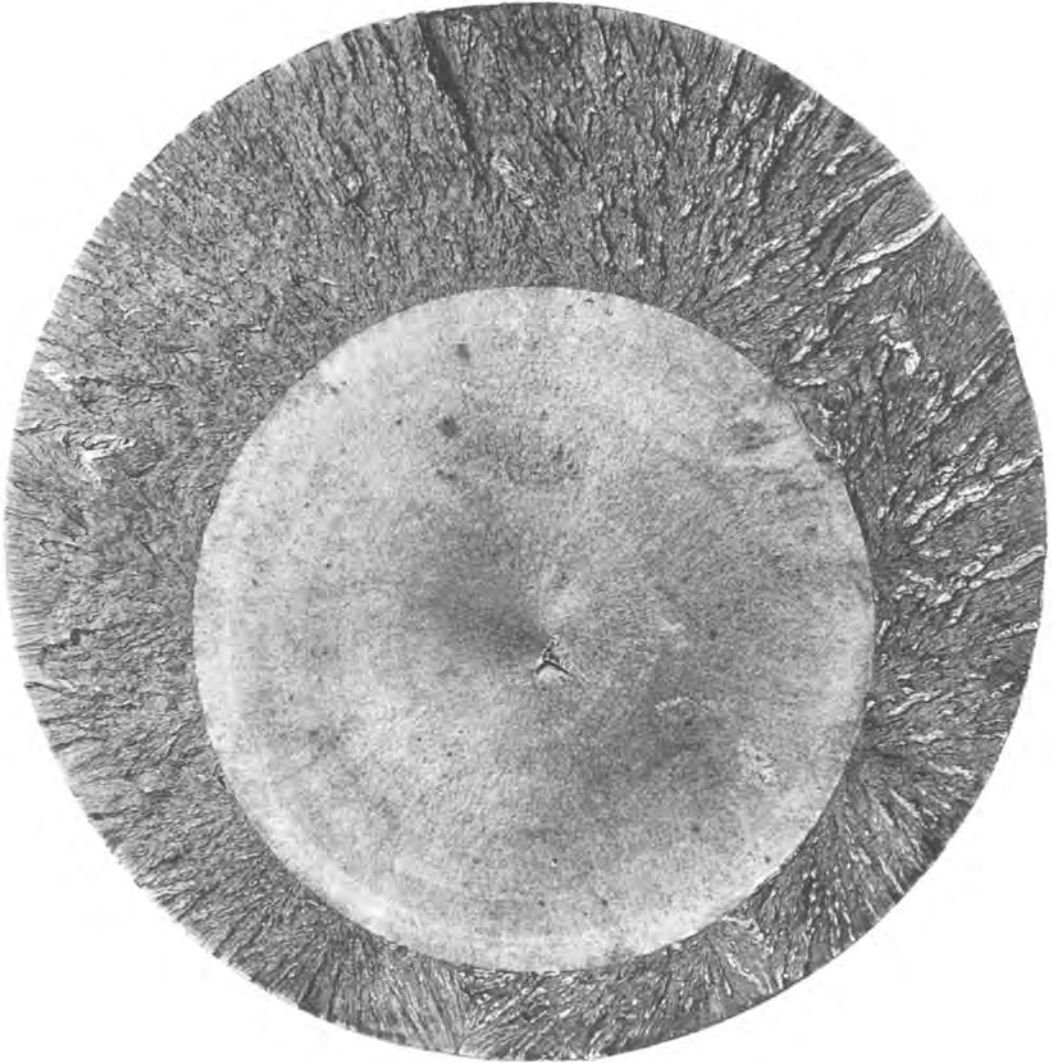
Tensile fatigue fracture starting near the center of an 8 in. diam piston rod of a forging hammer, made of low-carbon alloy steel hardened to 24 HRC at the surface and 17 HRC at the center. In an axially loaded part such as this, fatigue fracture can start anywhere in the cross section. In this case, a forging “flake” caused fatigue to start near the center of the section and to grow outward in a circular fashion until it was about 5.2 in. in diameter, at which time final rupture occurred in one load application. At no time did the fatigue crack reach the surface of the large shaft. Use of a vacuum-degassed steel would have prevented the flake that caused this type of fatigue failure, which occurred many years ago.
